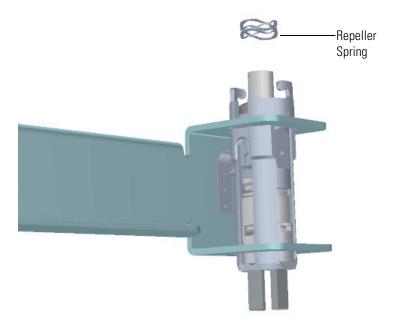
Inserting the Repeller Spring into the Sleeve
